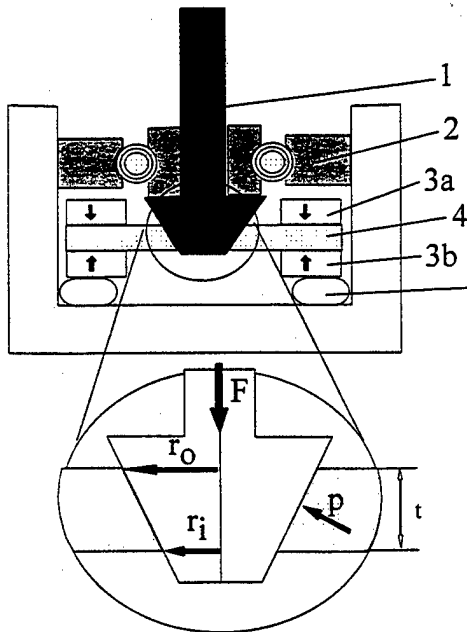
Structure of the motor. 1)rotor, 2) ball bearing, 3a, b) Piezoelectric rings, 4)metal ring, 5) rubber ring as spring.
